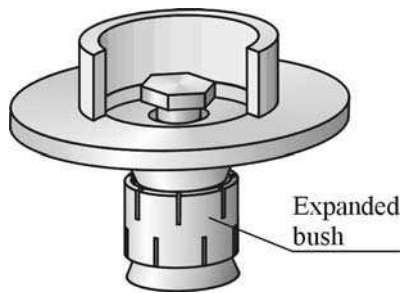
Bush-conical centring-fixing sub-assembly of clinometer
